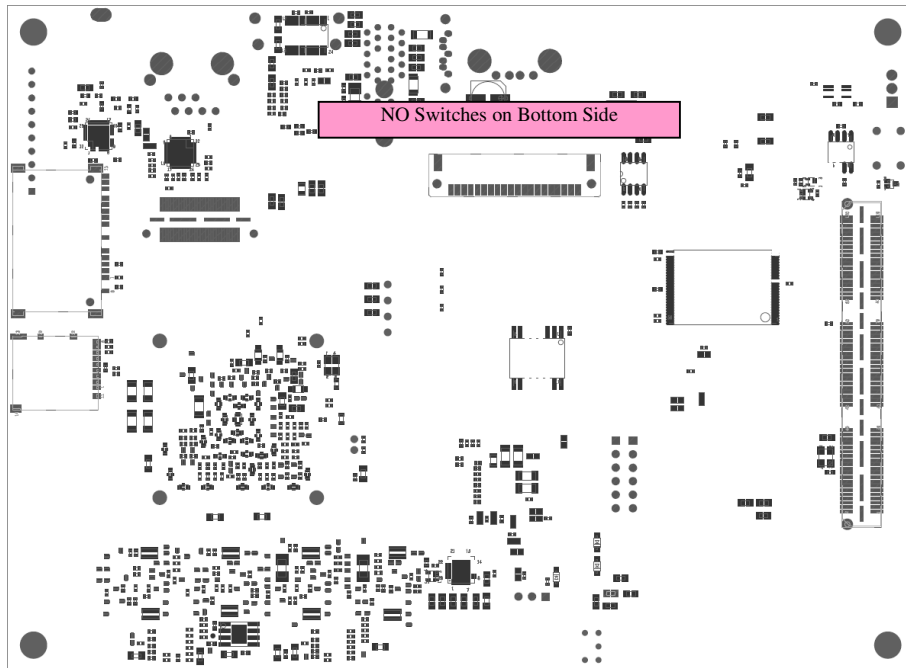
Locations of Switches on the PORTER(REV.B) Board (Bottom Side)
